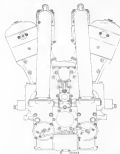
DISASSEMBLED CROSS-SECTION, SIDE VIEW
